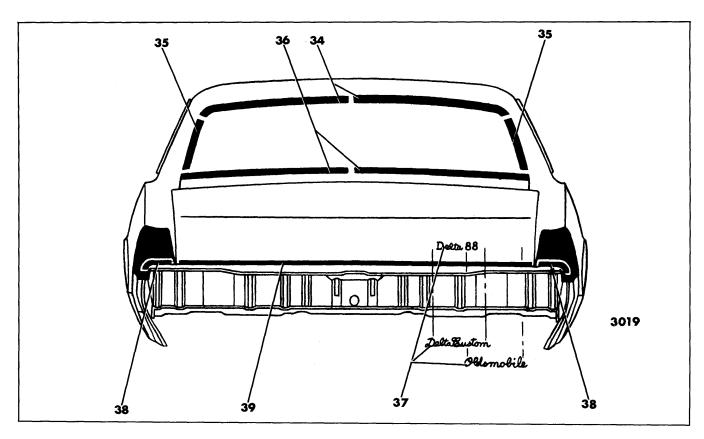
Oldsmobile 35600-36400-36600 Styles
